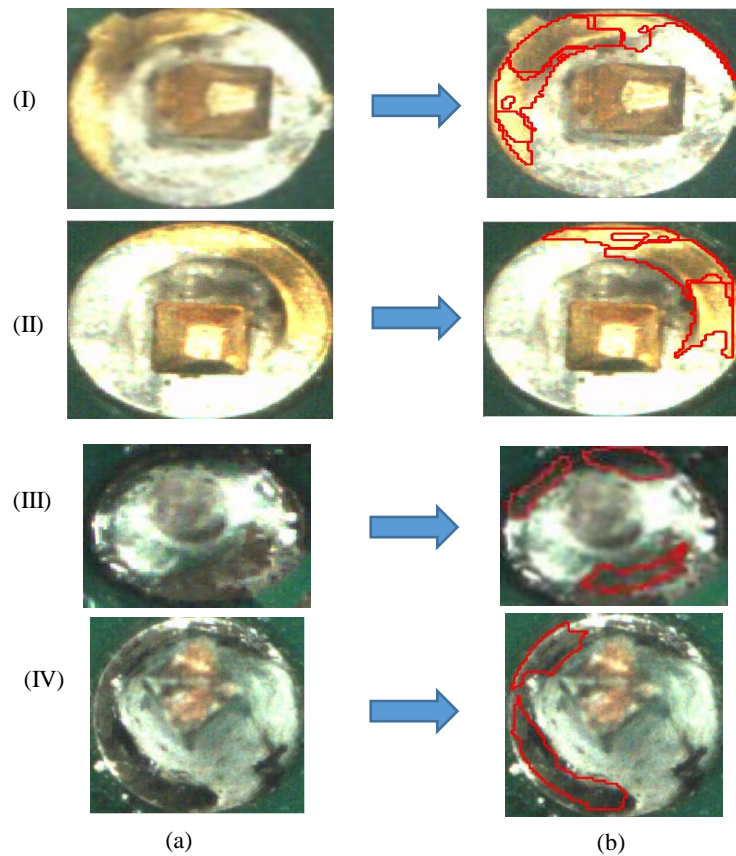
Detection of voids on tin and gold plated solder pad regions. (a) Solder joint. (b) Identified voids on (I) & (II) gold plated solder pads (III) & (IV) tin plated solder pads
